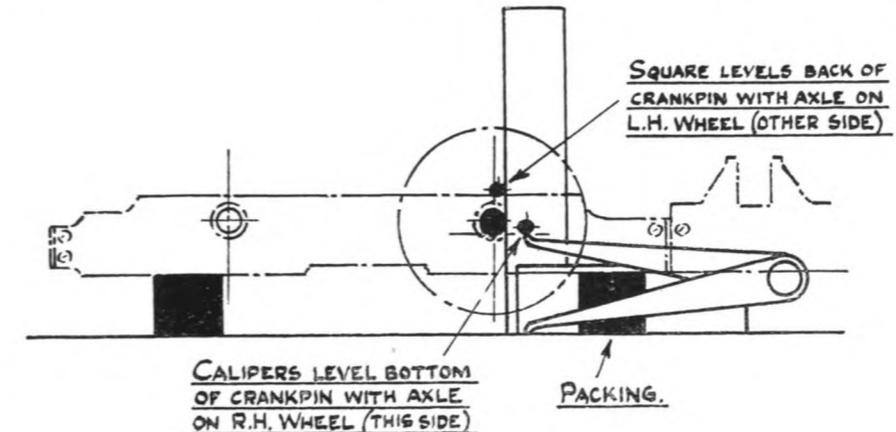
Pressing the left-hand wheel on to the short end of the driving axle in the drilling machine.
